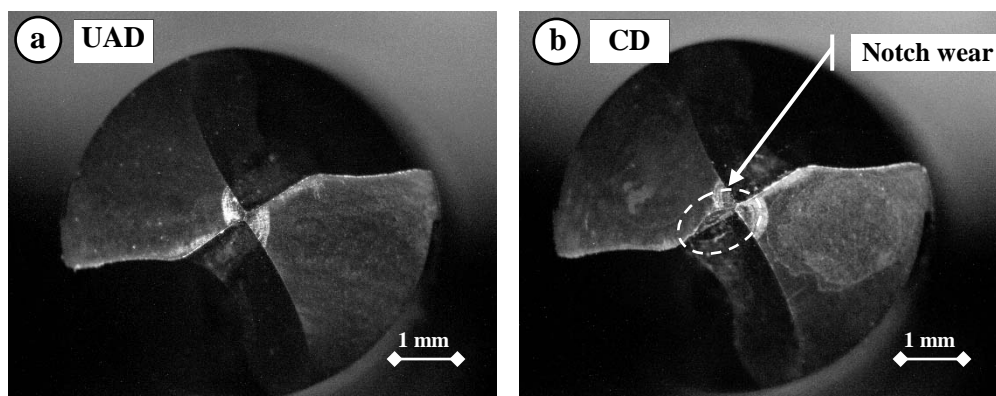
Tools wear after drilling using (a) UAD, (b) CD.
